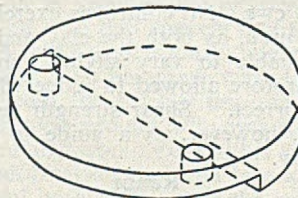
(a).—Core-box, Half-core, Pasted Core and Shear-test Adaptor.
